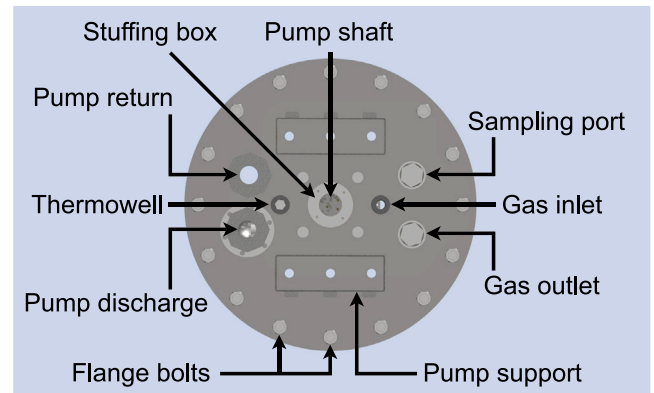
The flange of the MSTL, on top of which the pump was mounted. The two rectangular structures centered top and bottom are supports for the pump bearings and motor. Two 25 mm diameter experimental ports are located to the right of the shaft and are shown capped. The upper port, labeled sampling port, has a pipe that goes down near the bottom of the sump. The lower port terminates at the bottom face of the flange and is reduced and used as a gas outlet.
